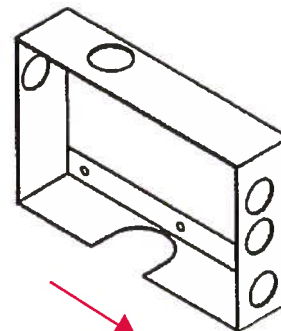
Model MB-P2 – Control Head Mounting Bracket.
